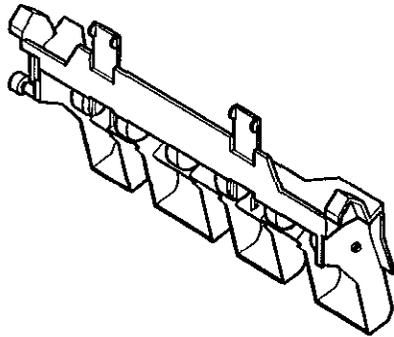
Paper feed guide assembly and paper feed pinch rollers.
